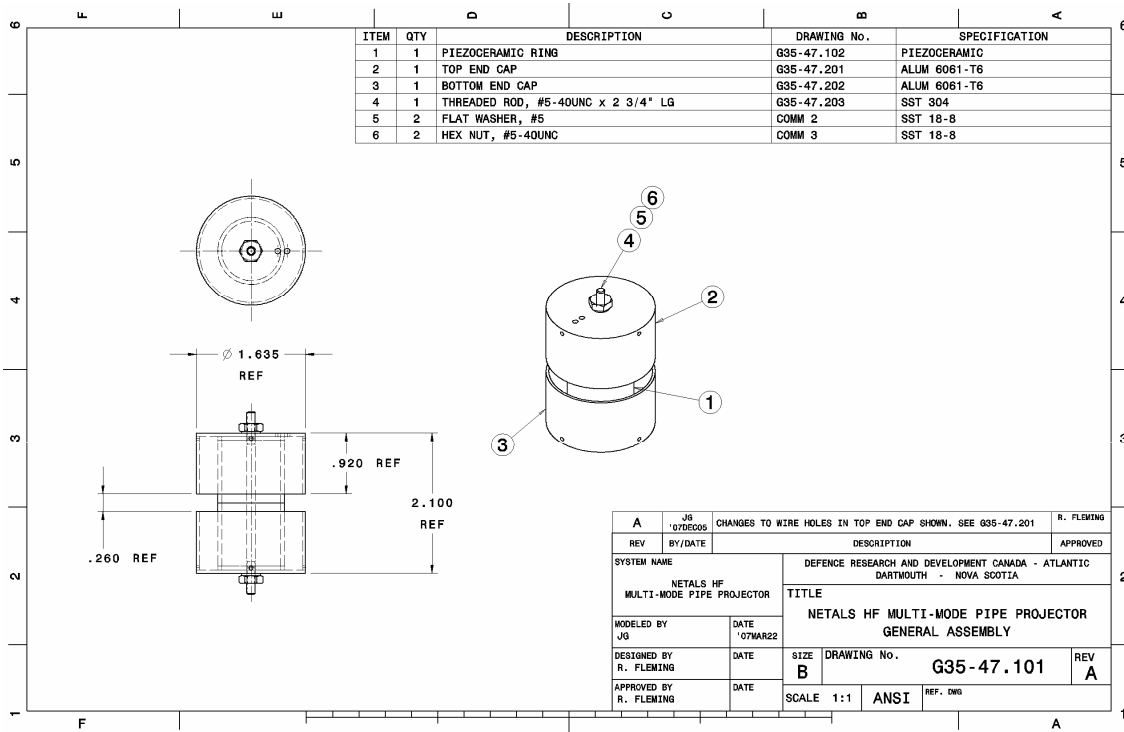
DSP² HF MMPP general assembly drawing G35-47.101.
